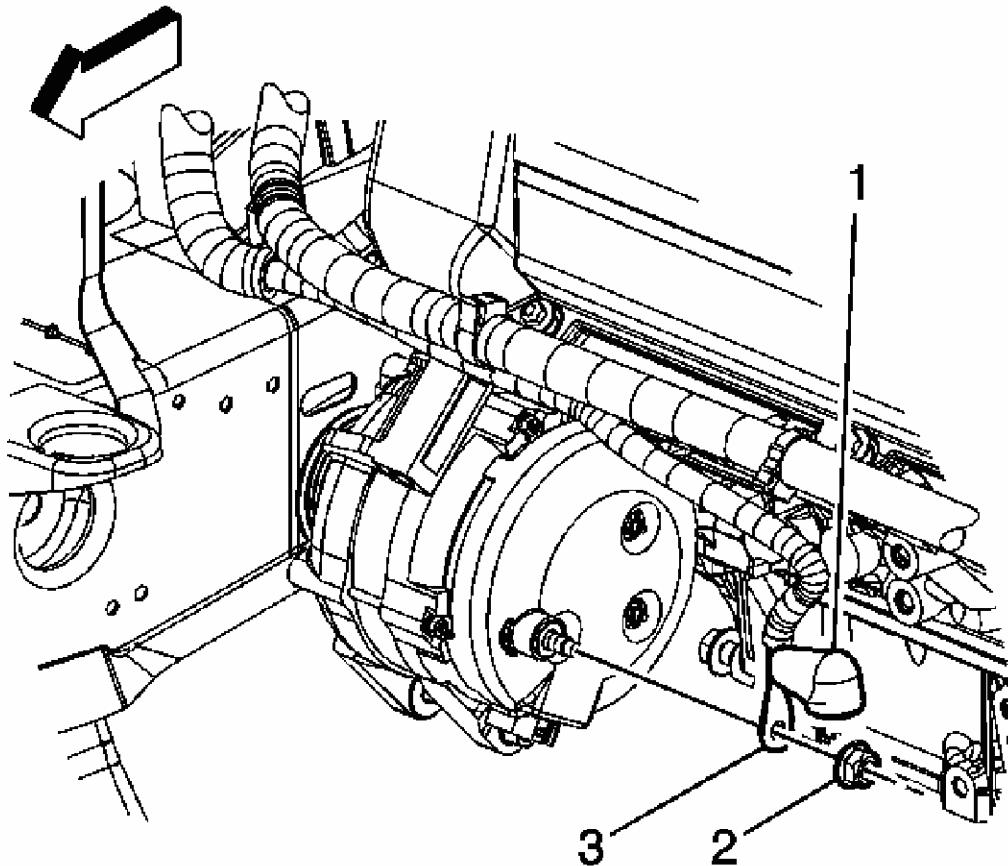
Identifying Generator Terminal & Starter Solenoid Cable Terminal
